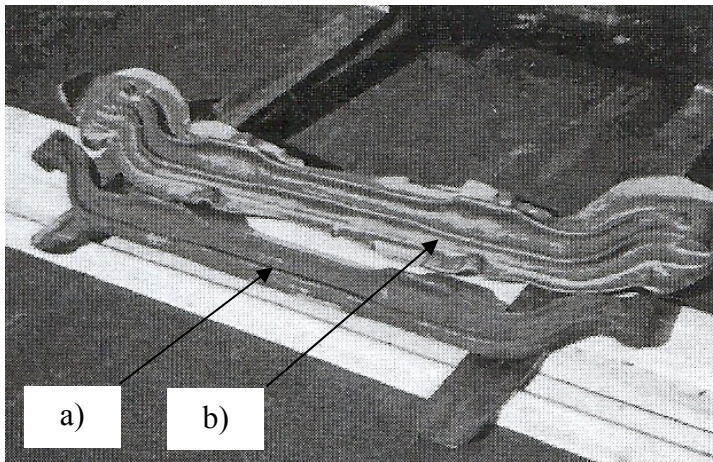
Front axle beam after (a) pre-forging and (b) finishing forging including 30% flash material. Billet weight; 115 kg.
